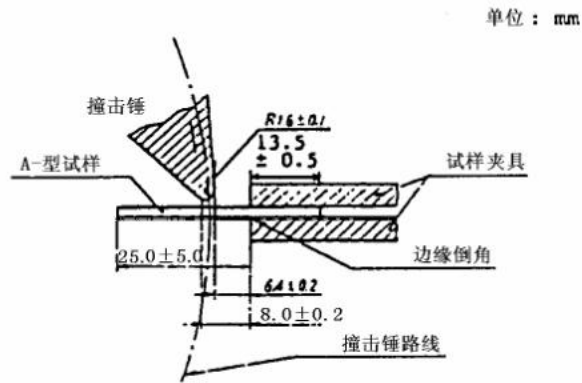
Test Specimen Holding Jig and Shape of Impact Hammer
